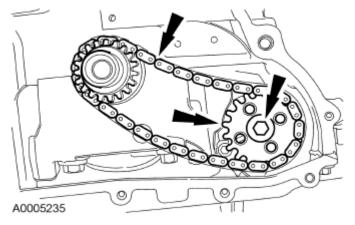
Locating Oil Pump Drive Chain, Sprocket And Bolt Courtesy of FORD MOTOR CO.
